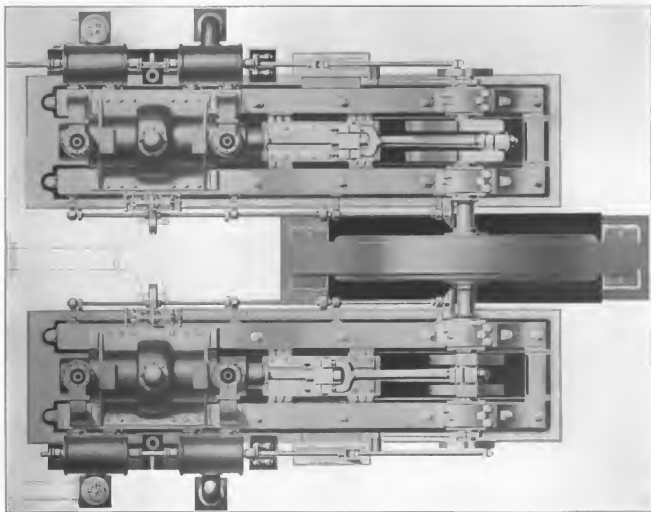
LARGE DIRECT-CONNECTED GAS ENGINE AND ALTERNATOR
